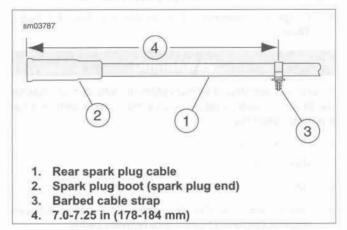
Rear Spark Plug Cable and Cable Strap
